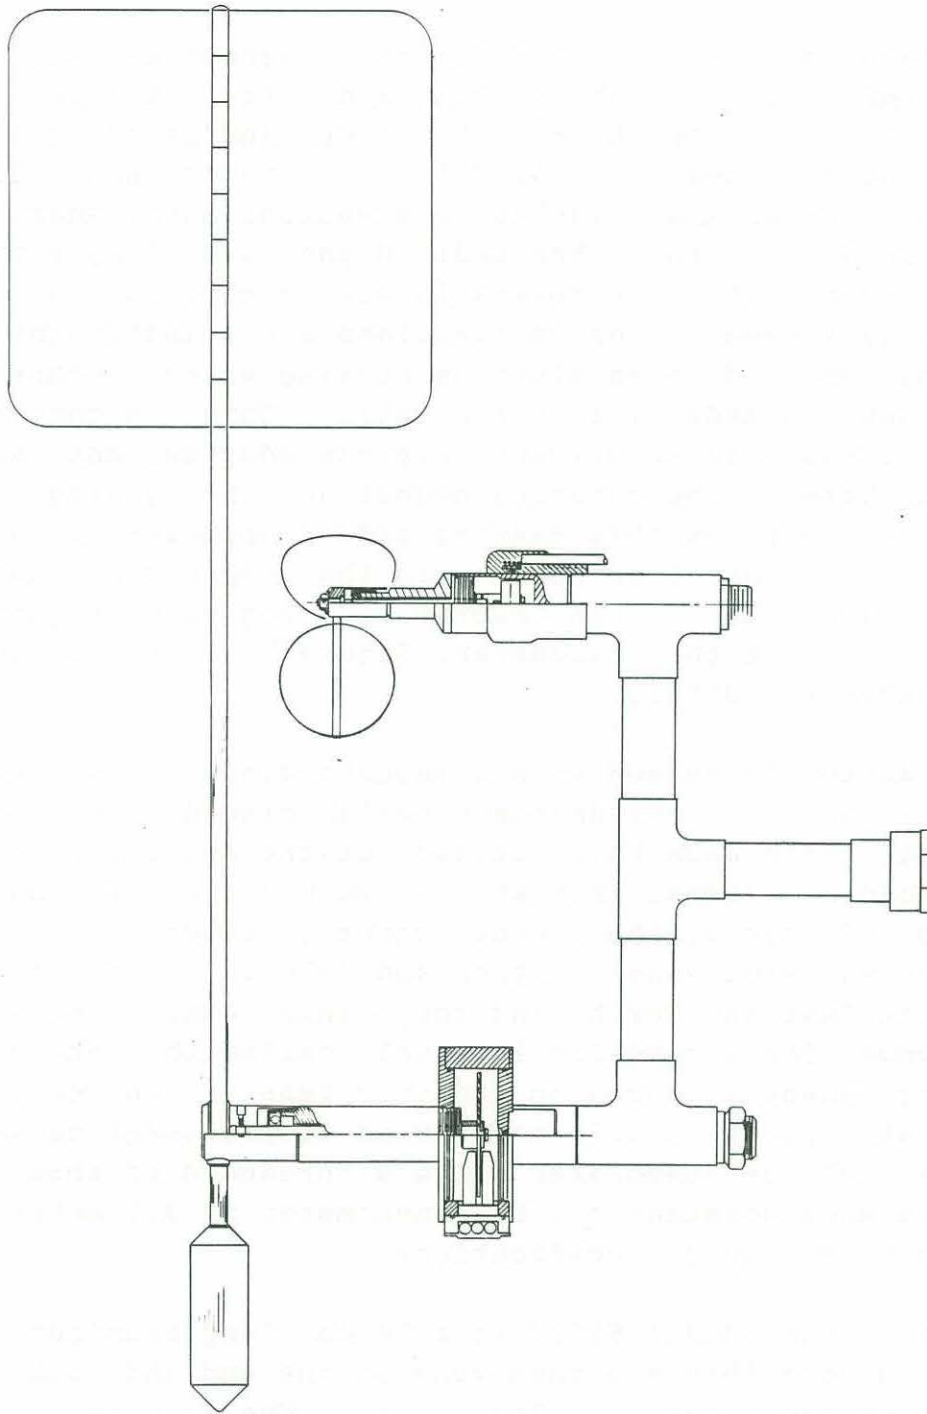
Section view of the Standard Gill VAWR cup anemometer and wind-vane assembly.
